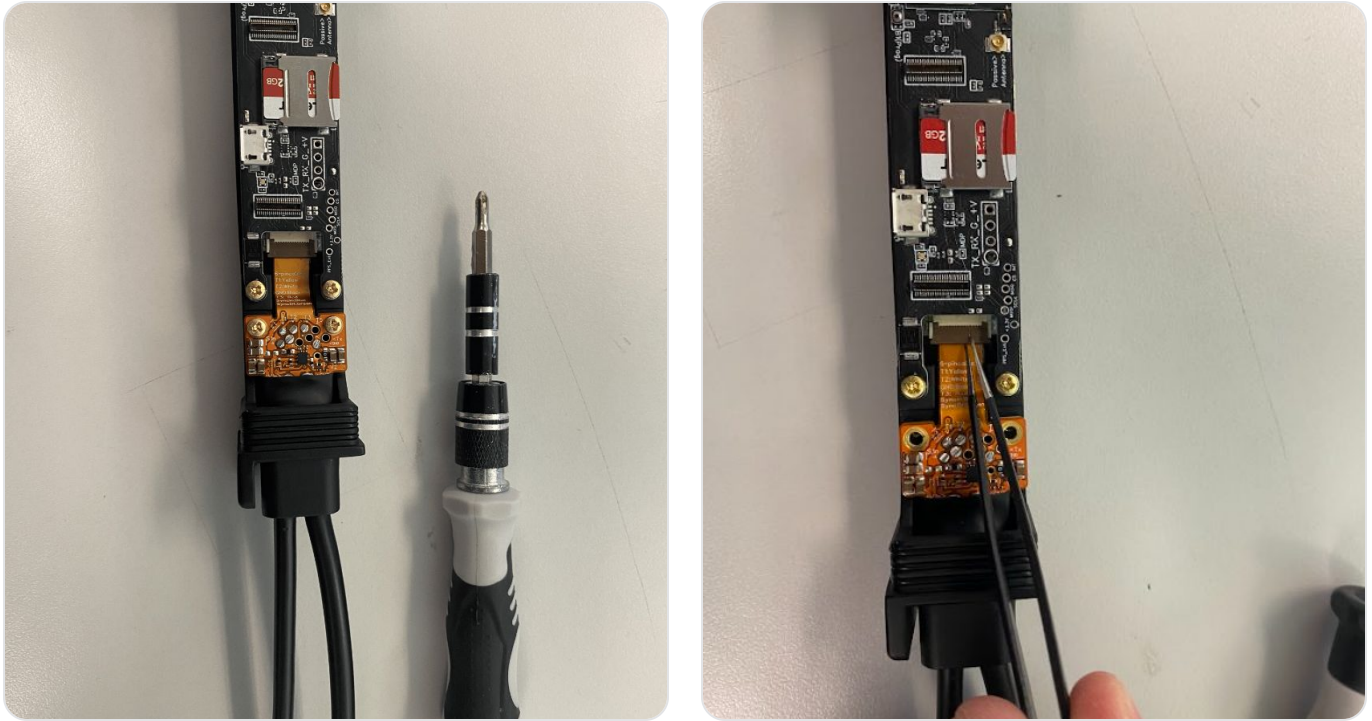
Left: Magpie with the case removed; the screws to remove are highlighted. Right: the hinged flex-cable connector to disconnect, shown with tweezers.
